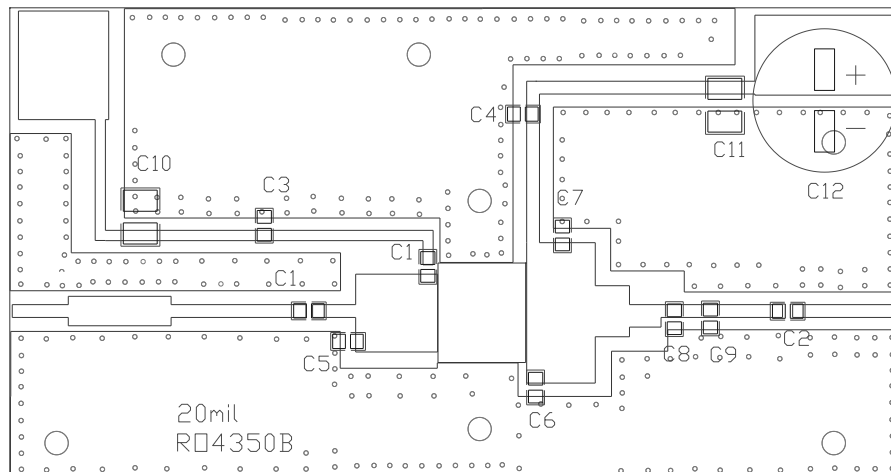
Test Circuit Component Layout(2500~2700MHz)
